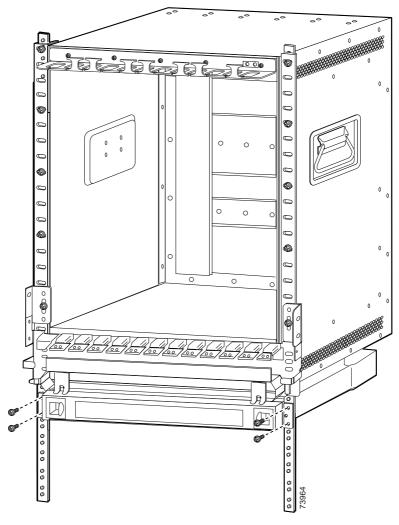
Installing the Cable Storage Drawer in the Rack
